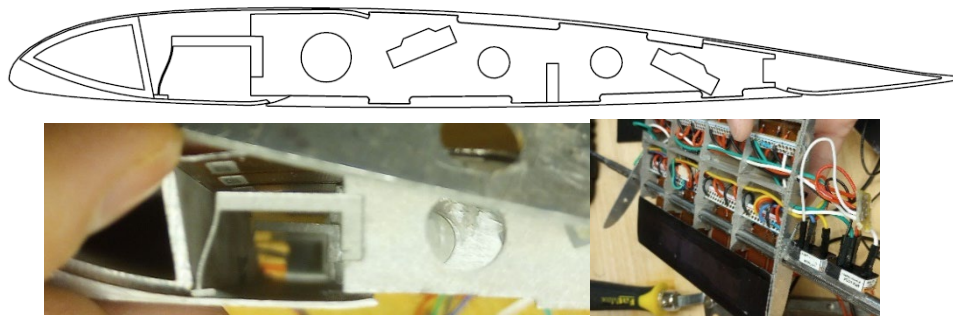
Morphing Assembly Photo, (Top) CAD image, (Bottom left) Complaint Hinge, (Bottom Right) Internal View.
